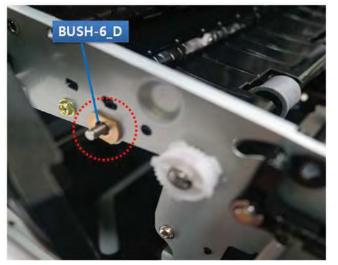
Remove the Paddle Shaft sub assembly paddles (3 of 6)
